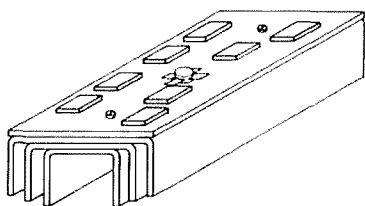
Printed-circuit board and heatsink mounting details. Mounting pads for components are made of PC board material.
